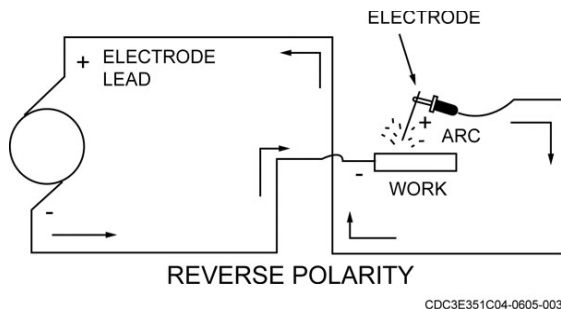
Arc welding circuit, reverse polarity.
